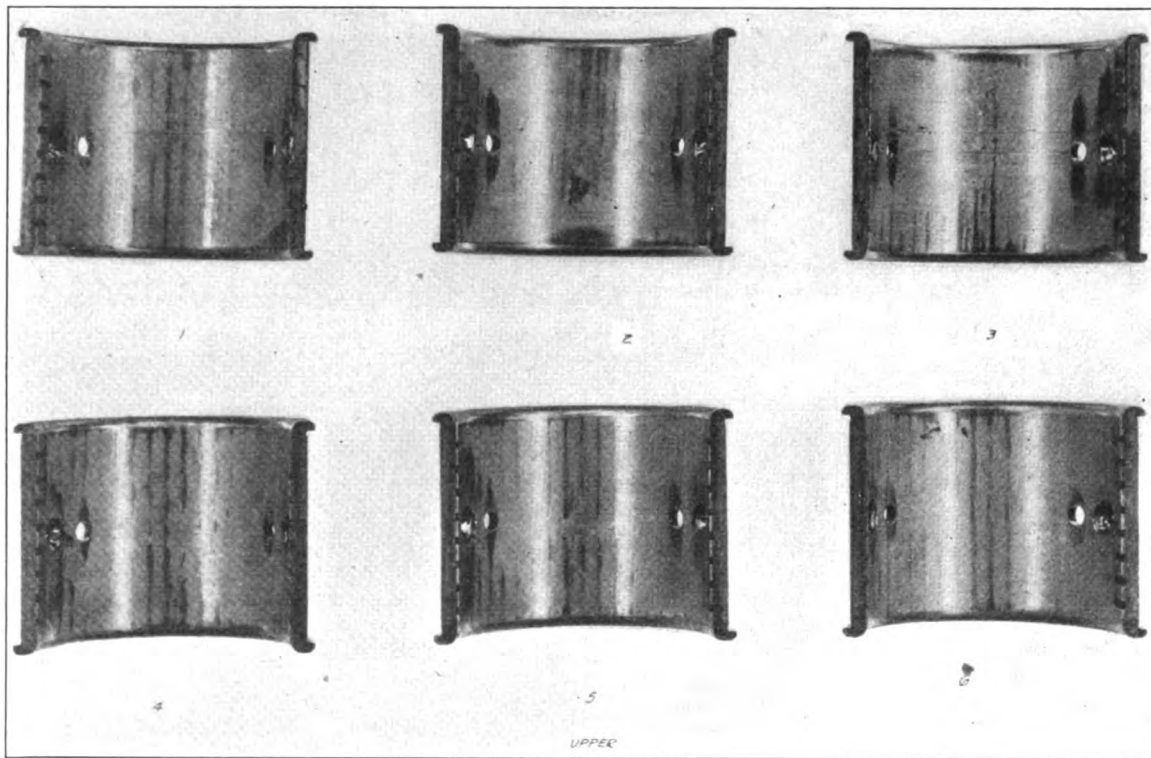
Upper connecting rod bearings after endurance run. Note original reamer marks made during assembly of engine.
